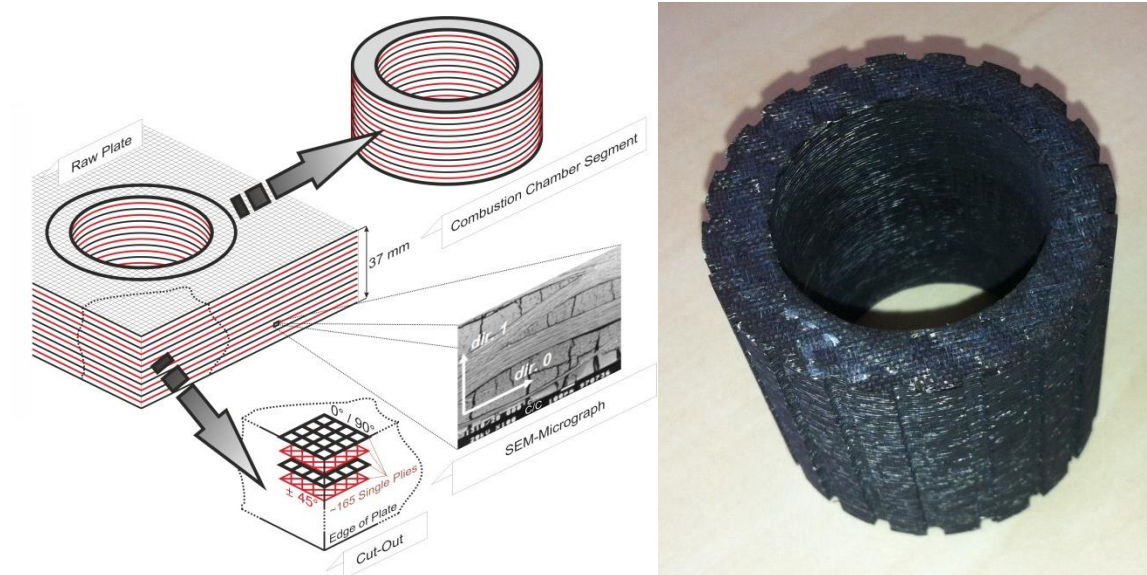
Manufacturing of CMC specimens or ring-shaped bearing shells.
